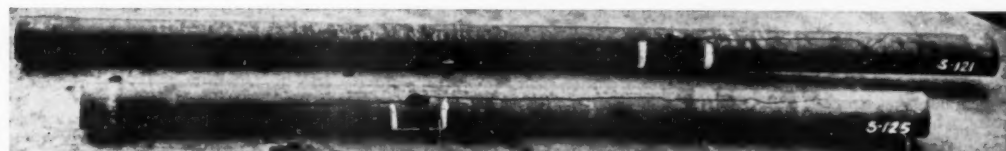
Mill test failures of experimentally produced 5-in.-o.d., N-80 casing.
